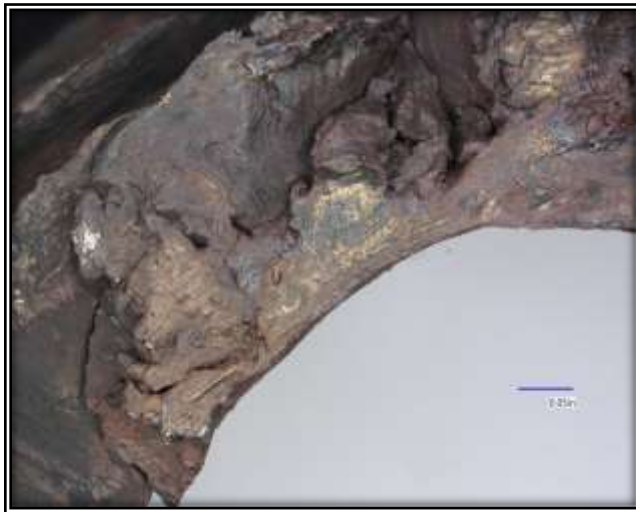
20x original magnification of a region of chipped and damaged material on the fracture surface of the rear sample.
